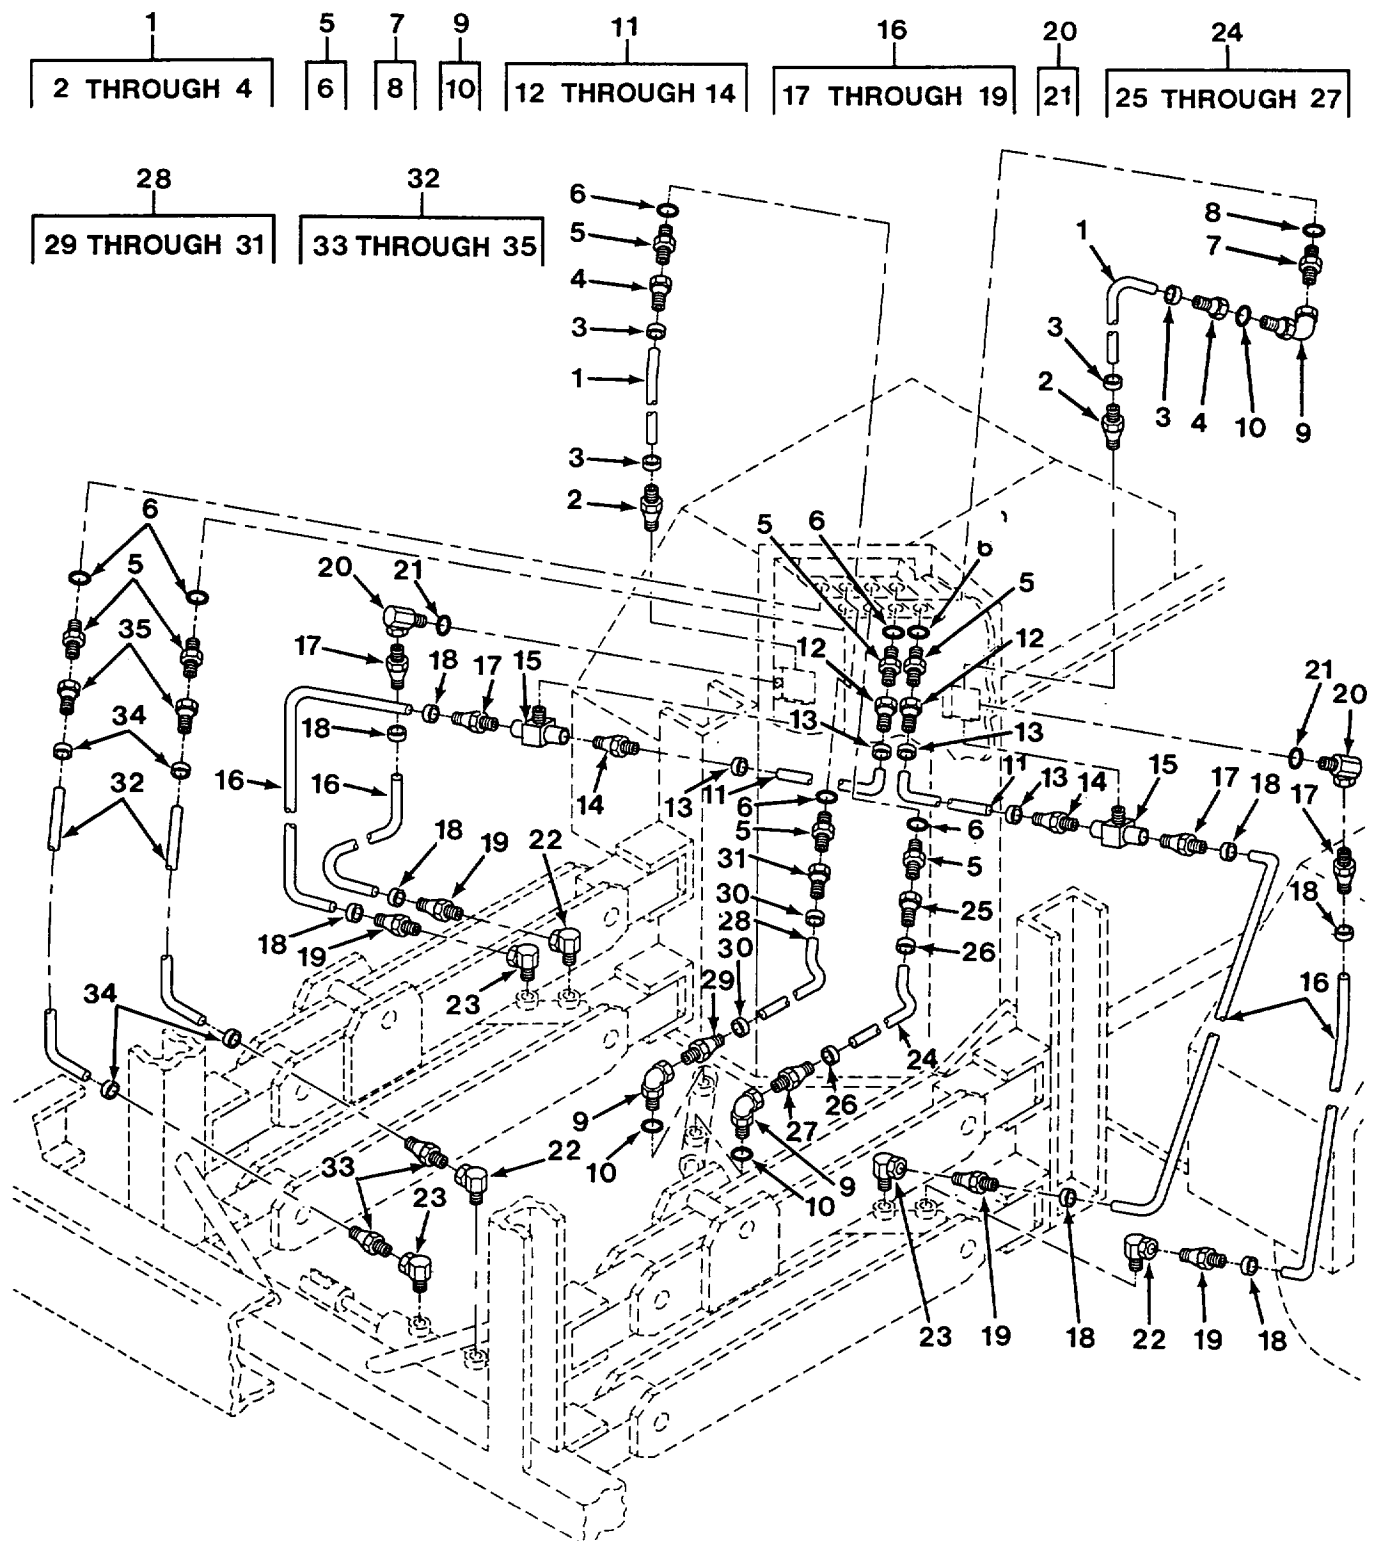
SPRAY BAR HYDRAULIC LINES AND FITTINGS
